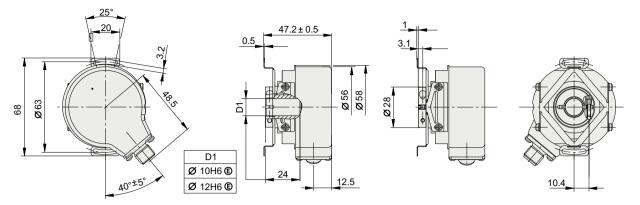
Dimension drawing of hollow shaft, all data in mm
